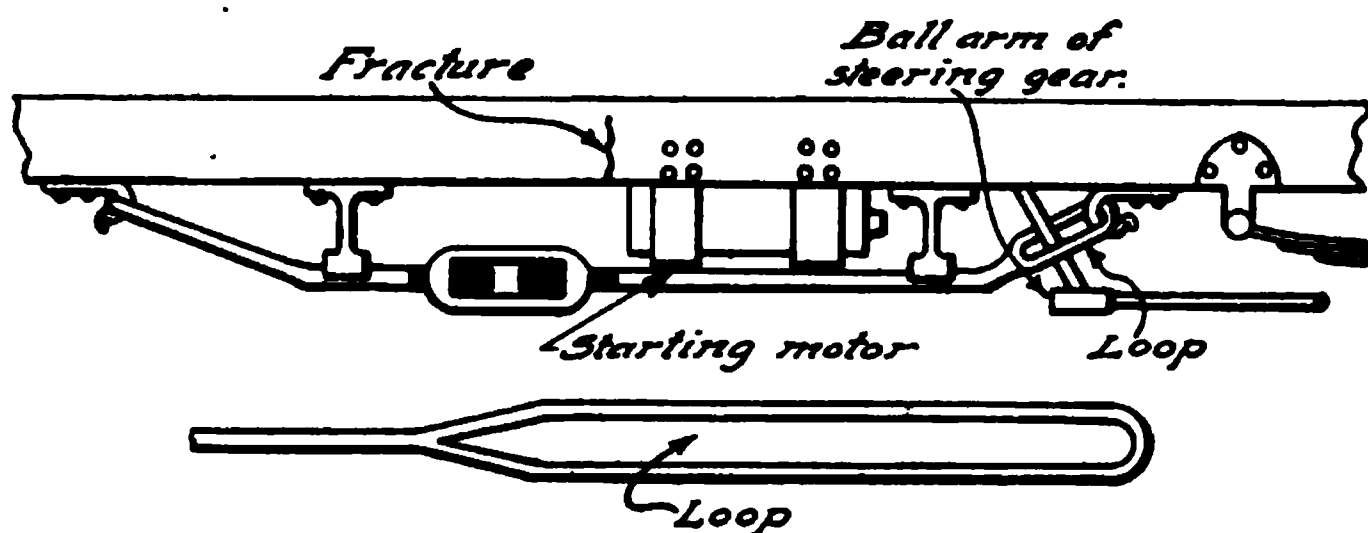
Bracing Fractured Frame with Bar and Turnbuckle
